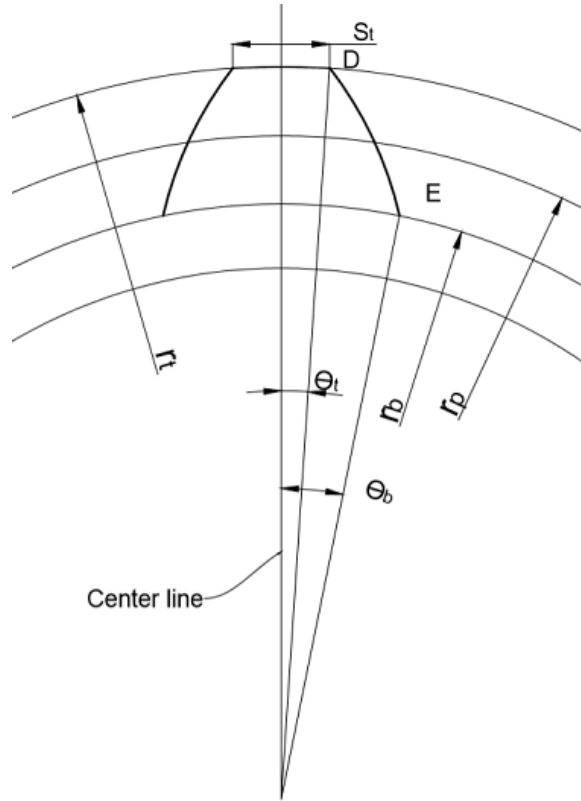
Involute profile of symmetric spur gear tooth
